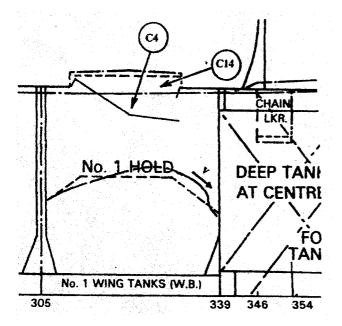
(a): Sketch of No. 1 Hold and Ore Slide
